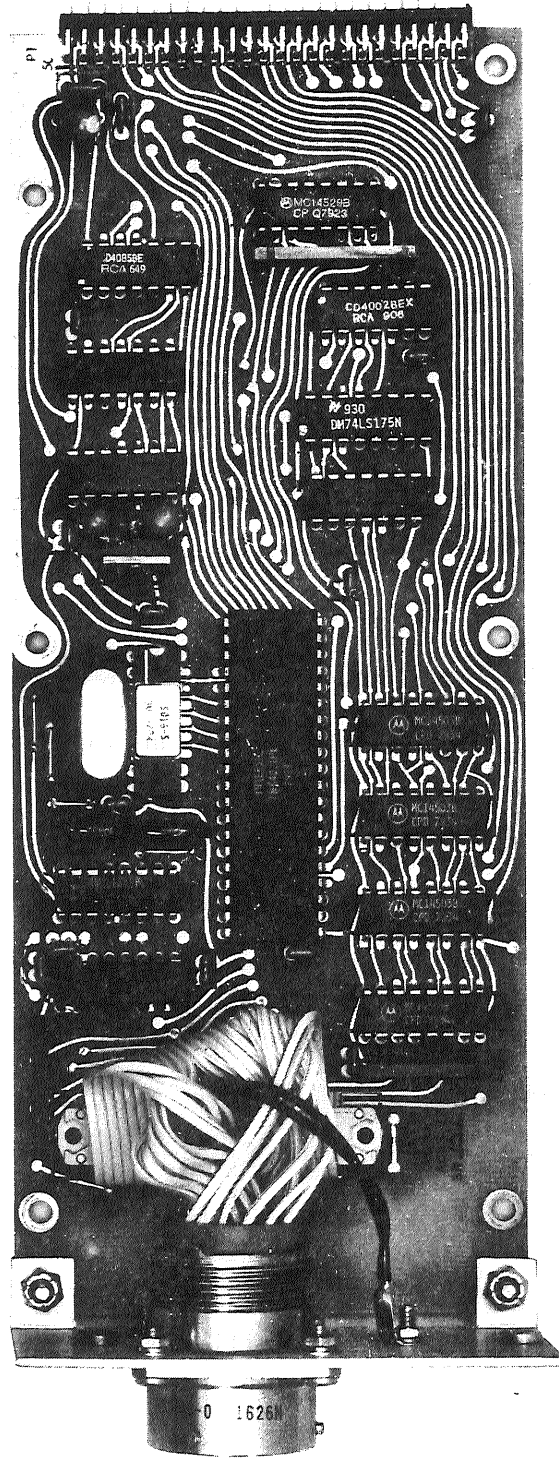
A. Serial Asynchronous Interface Circuit Card A6A1 Assembly
